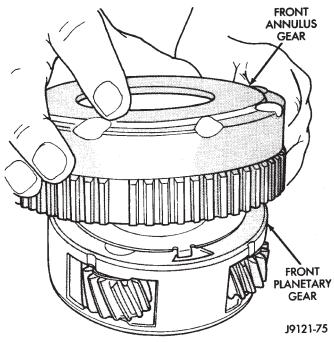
Assembling Front Planetary And Annulus Gears—46RH
